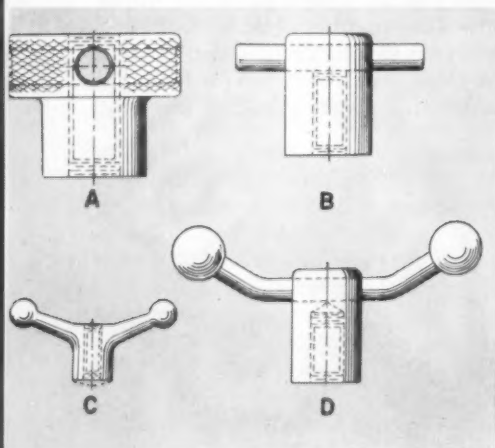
(A) Knurled knob with cross holes into which rod can be inserted for greater leverage; (B) nut with cross pin for finger-gripping purposes; (C) forged handle knob for use where two hands are used for tightening purposes; and (D) handled knob having plastic balls at ends of cross handle.
